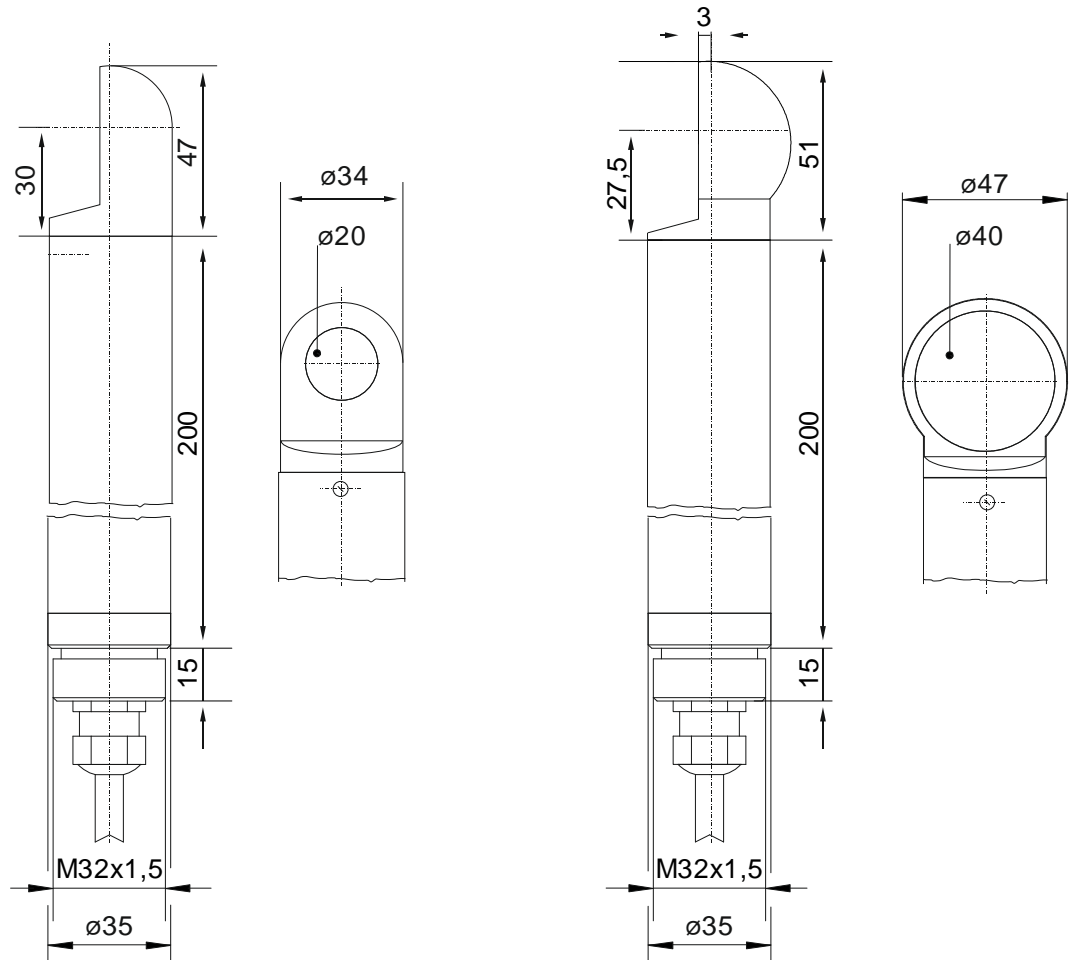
Dimensioned drawing rod sensor Type NOS-V200/V300 mit \varnothing 20/40 mm
